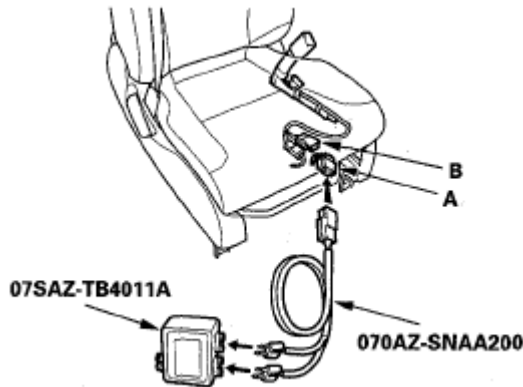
Identifying Floor Wire Harness 4P Connector And Front Passenger's Seat Belt Buckle Tensioner Connector
